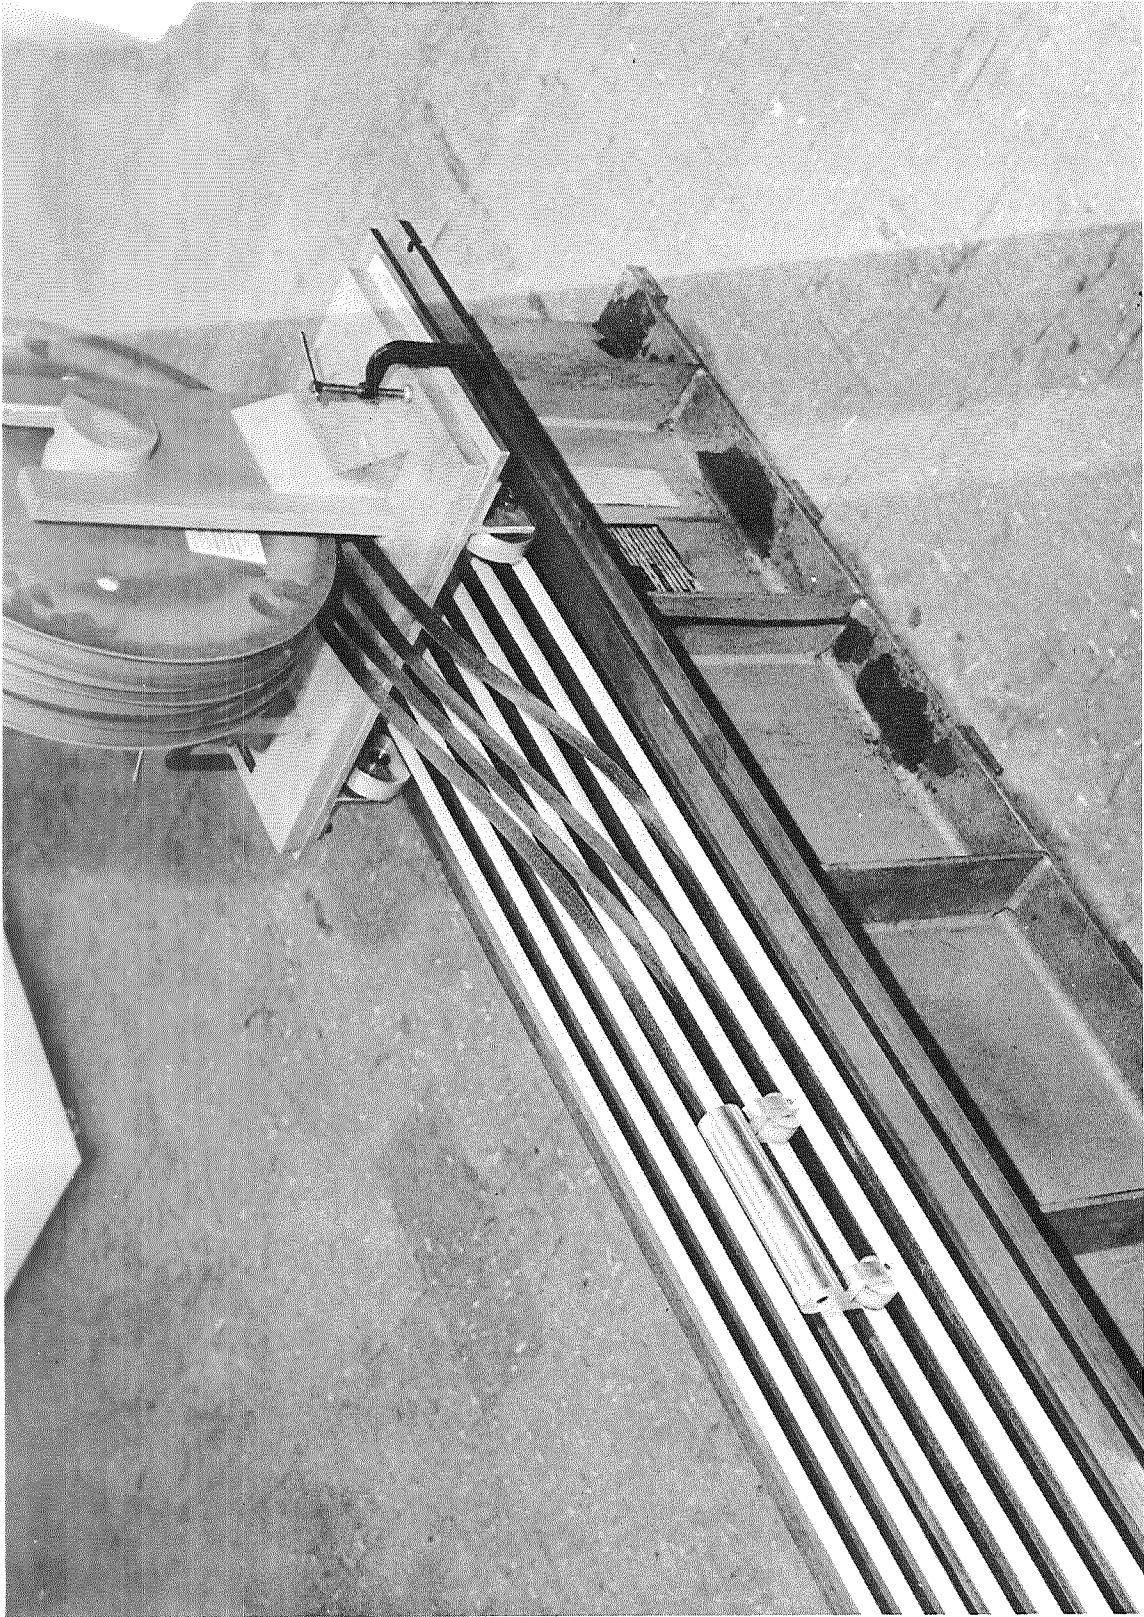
LAMINATING AND BOND FIXTURE.
